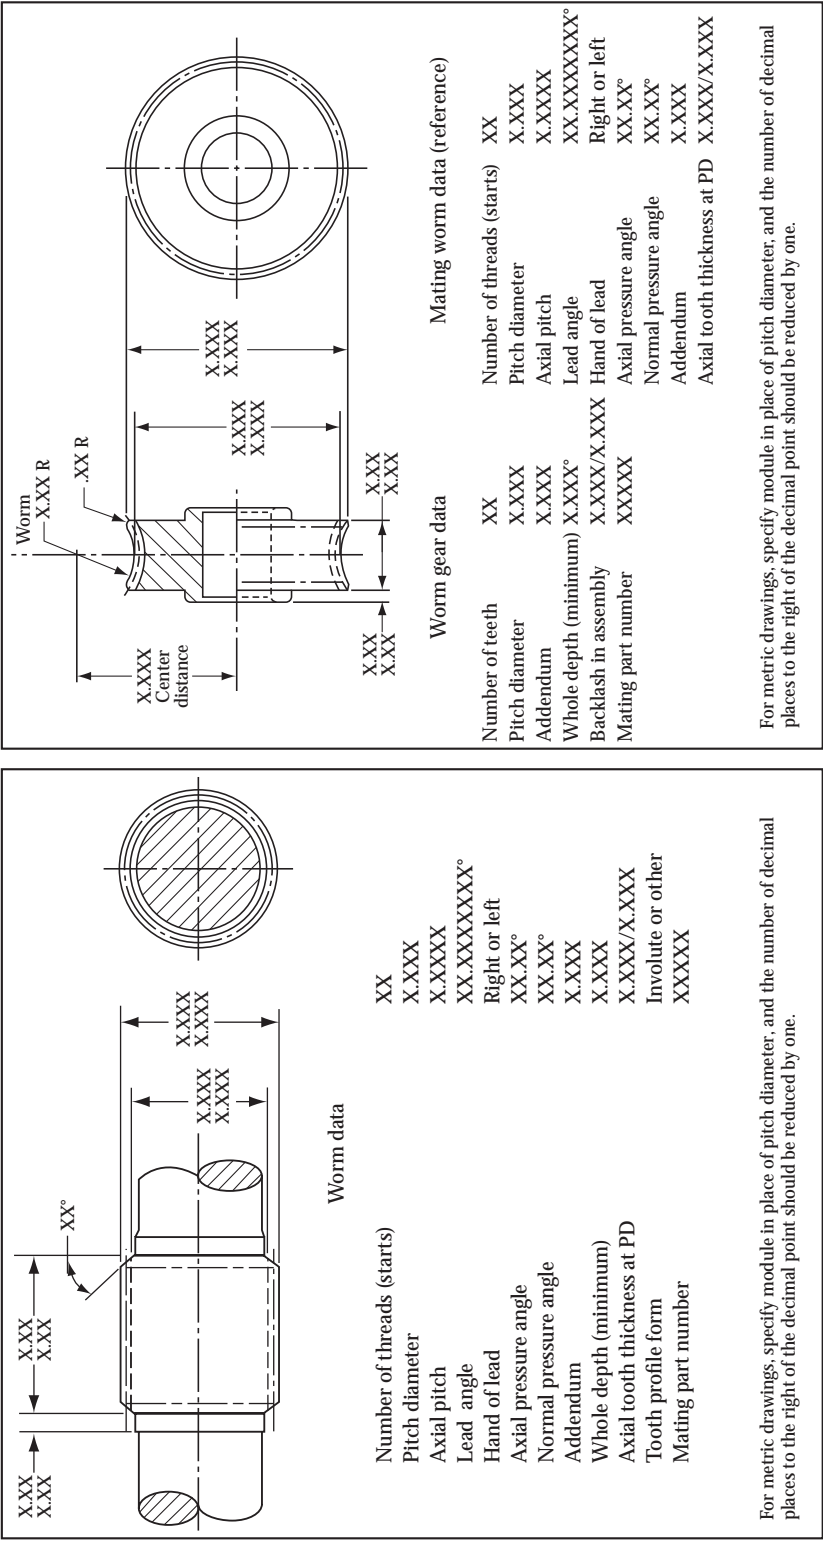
Standard drawing format for single-enveloping worm gears.
